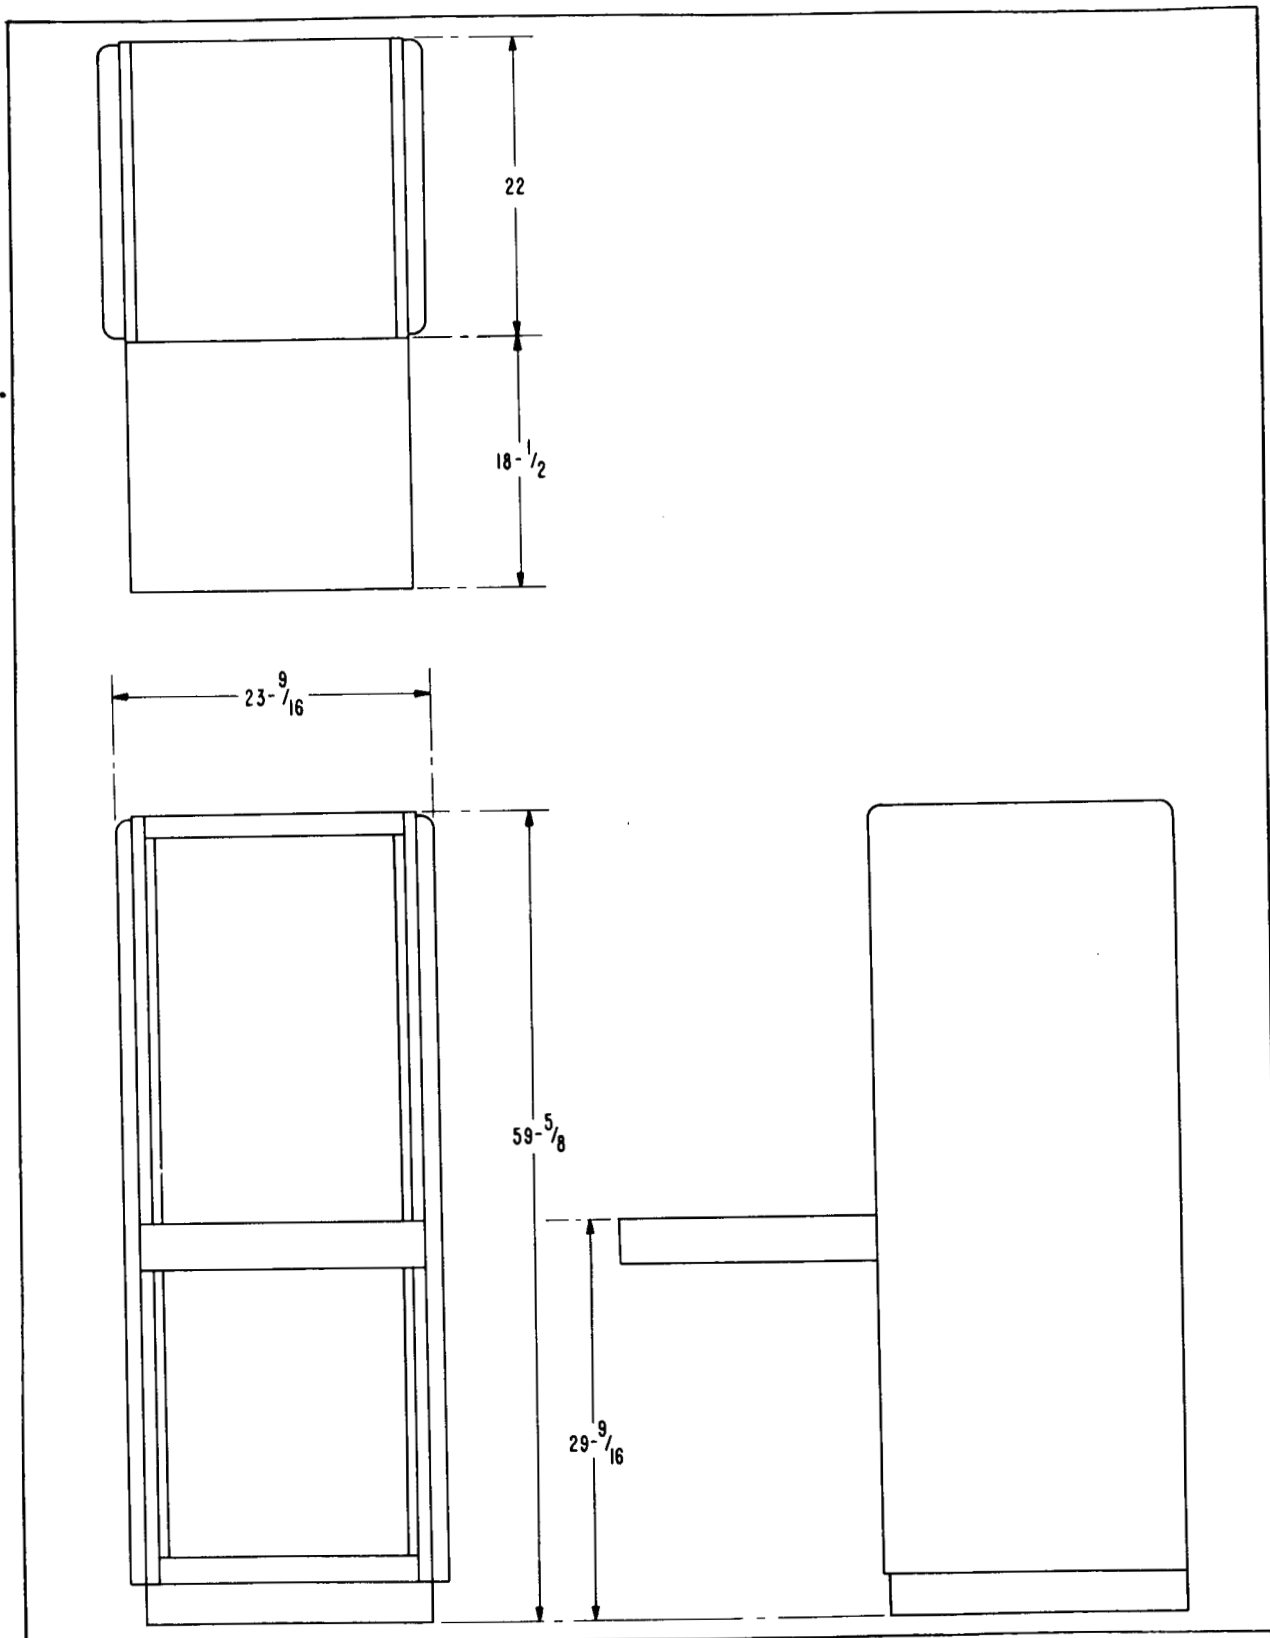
Active Acquisition Aid Control Console Outline Dimensions
